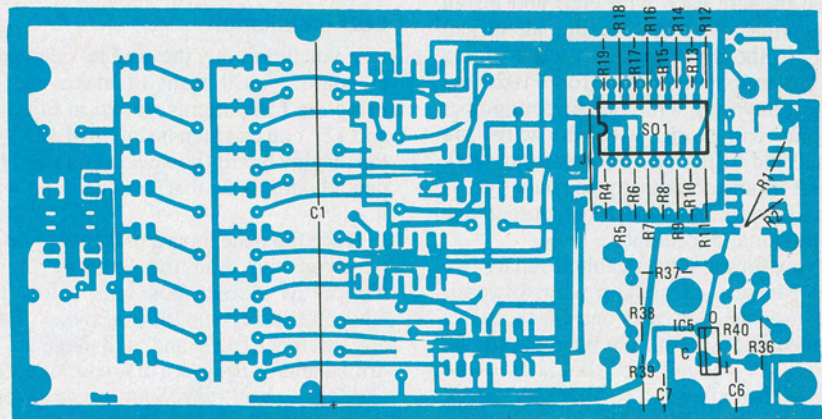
PARTS PLACEMENT on "foil-side" of display board. Resistor R2 (at right) is soldered to pads on opposite sides of board.
